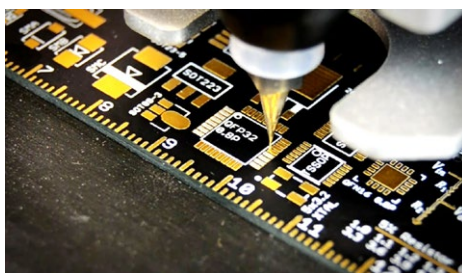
V-One dispensing solder paste on pre-fabricated PCB.
